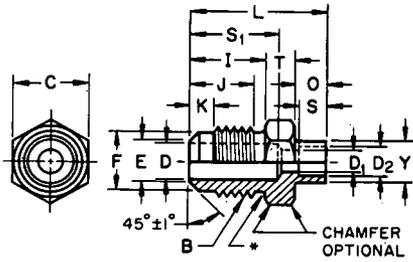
FLARE TO SOLDER REDUCING CONNECTOR (HALF UNION)
